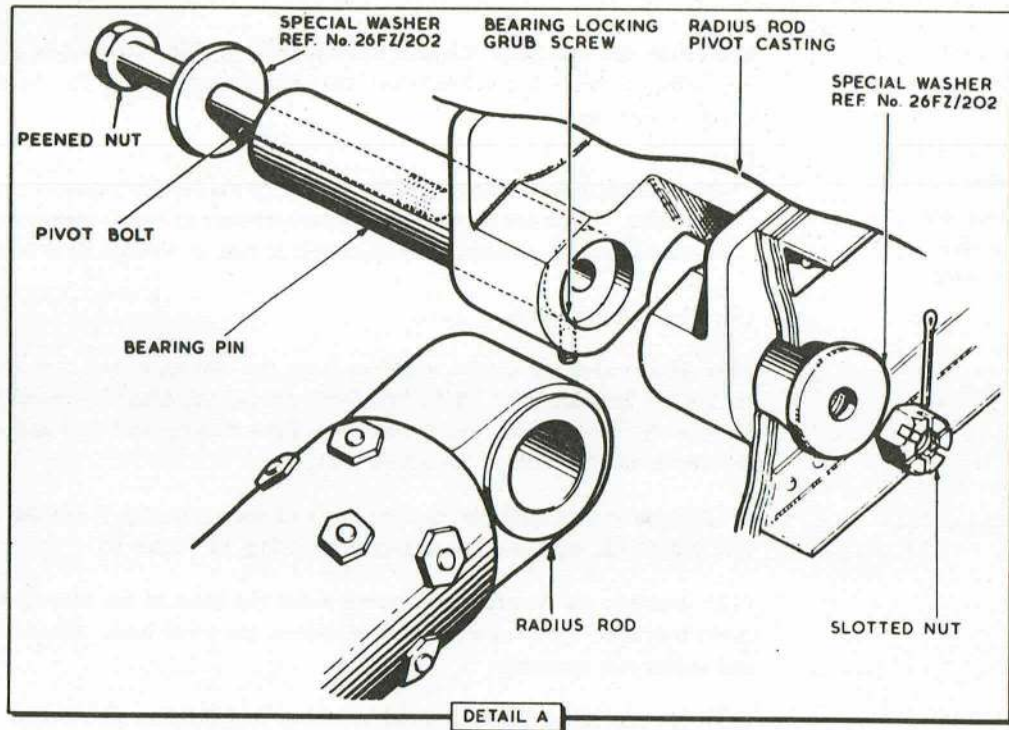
UNDERCARRIAGE-REMOVAL AND ASSEMBLY (I)
